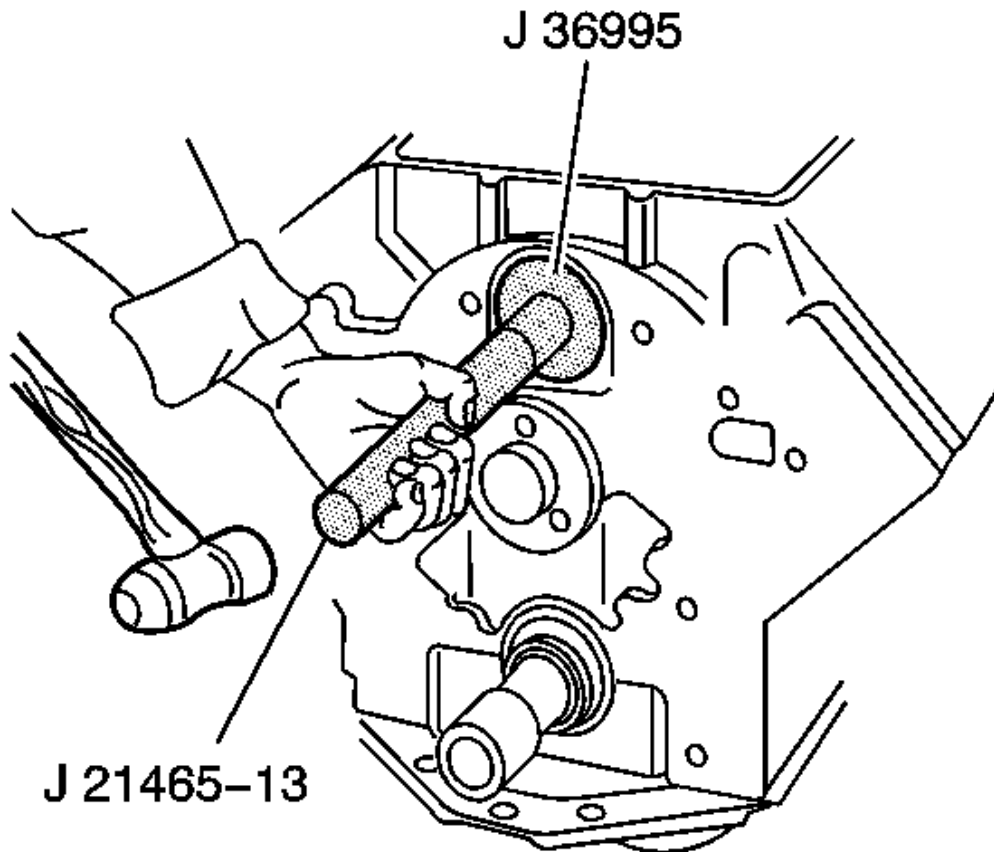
Installing Balance Shaft Bearing Using J 36995 & J 21465-13
